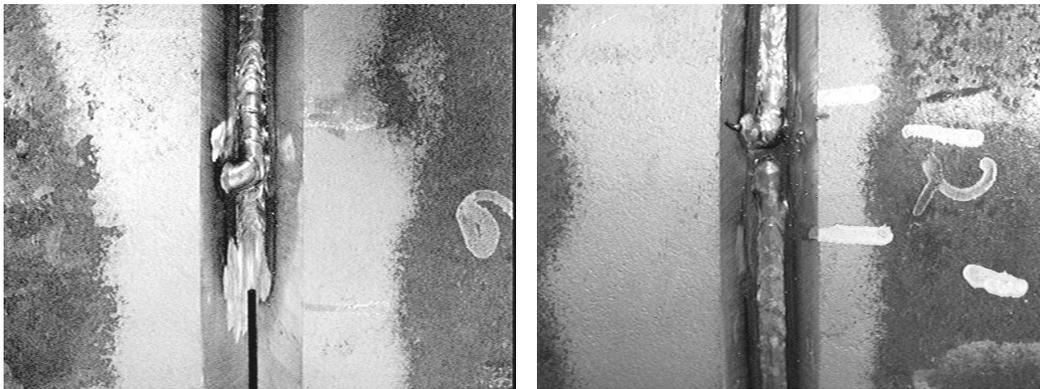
Termination and Initiation of Root Weld on Groove Face
